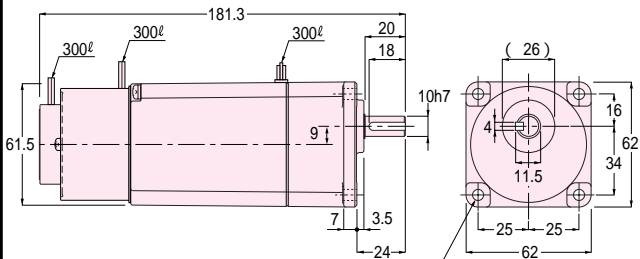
LGPN-10^M_B-3 ~ 200-S06
